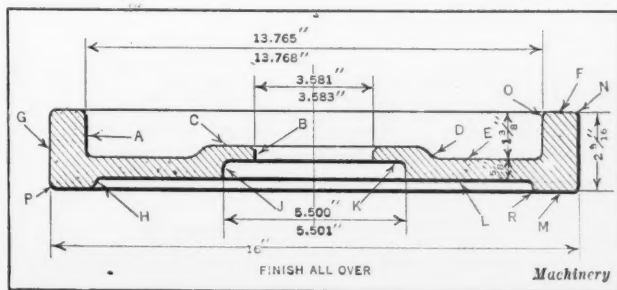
Sectional Dimensioned Drawing of the Flywheel
